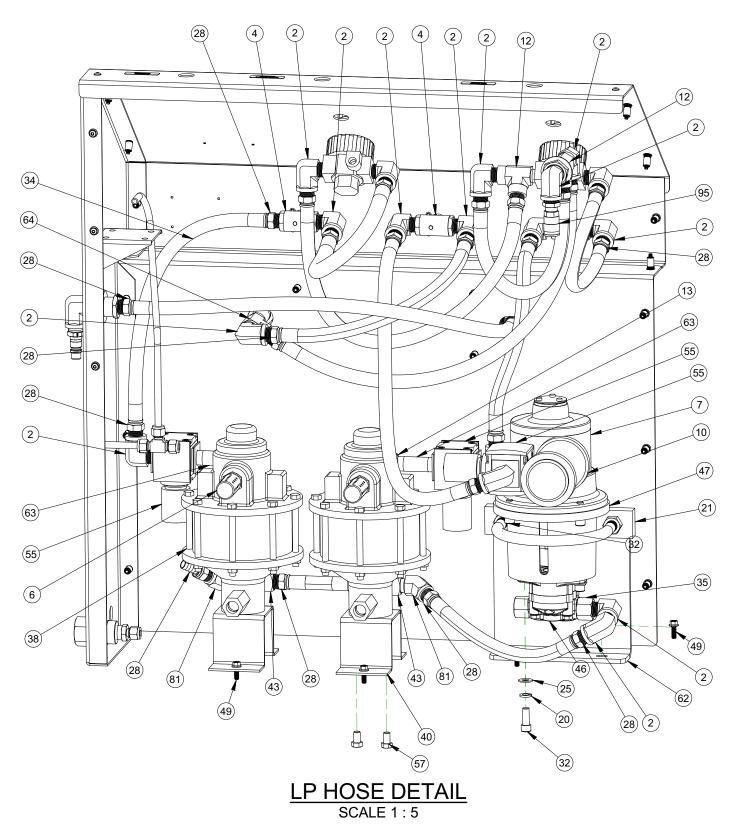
CONSOLE HOSE DETAIL ASSEMBLY (P/N 88479)
